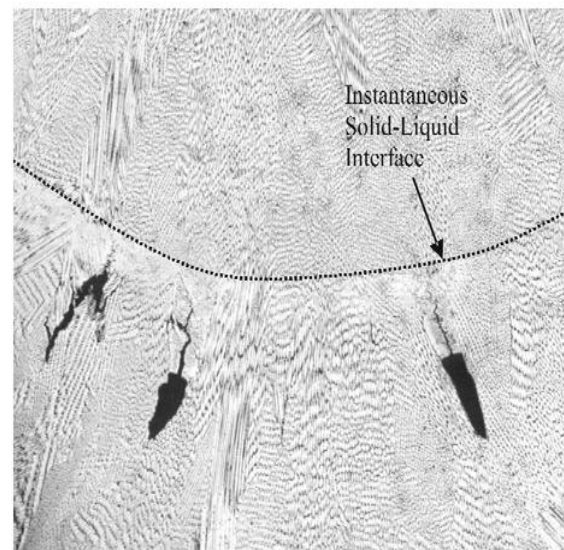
(b) Weld Solidification on Cracking in a type 310 SS transverse Vareststraint specimen
